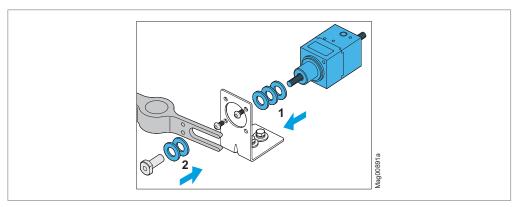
Mount magnet, washers and union nut (locked when de-energised.)
